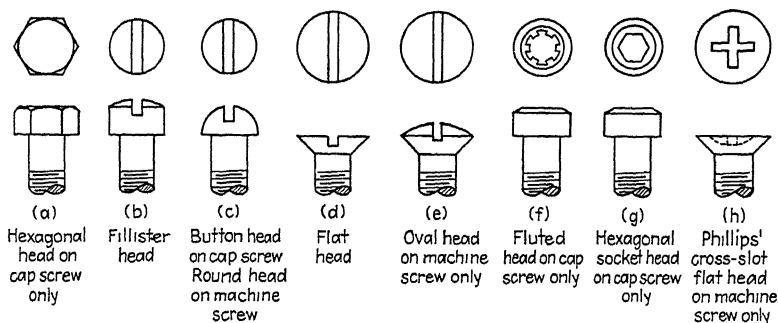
Forms of cap- and machine-screw heads. Cap-screw ends are chamfered to the thread root at 35 deg. Machine-screw ends are flat.
